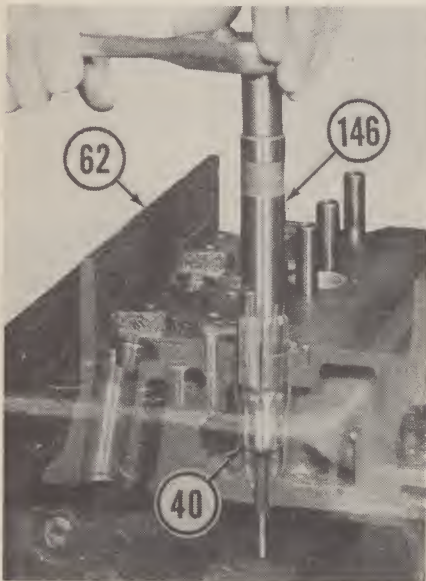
C—GM engine. Resizing the injector hole tube for the injector body nut and spray tip with GM tool J 5286-7.
